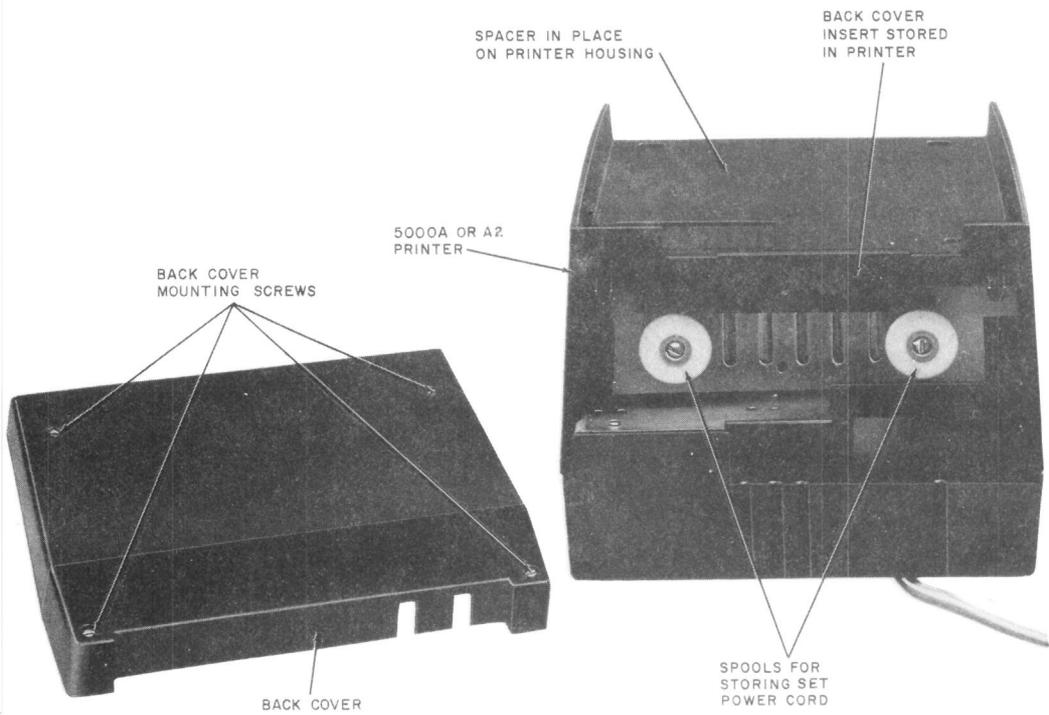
5000A or 5000A2 Printer With Back Cover Removed
